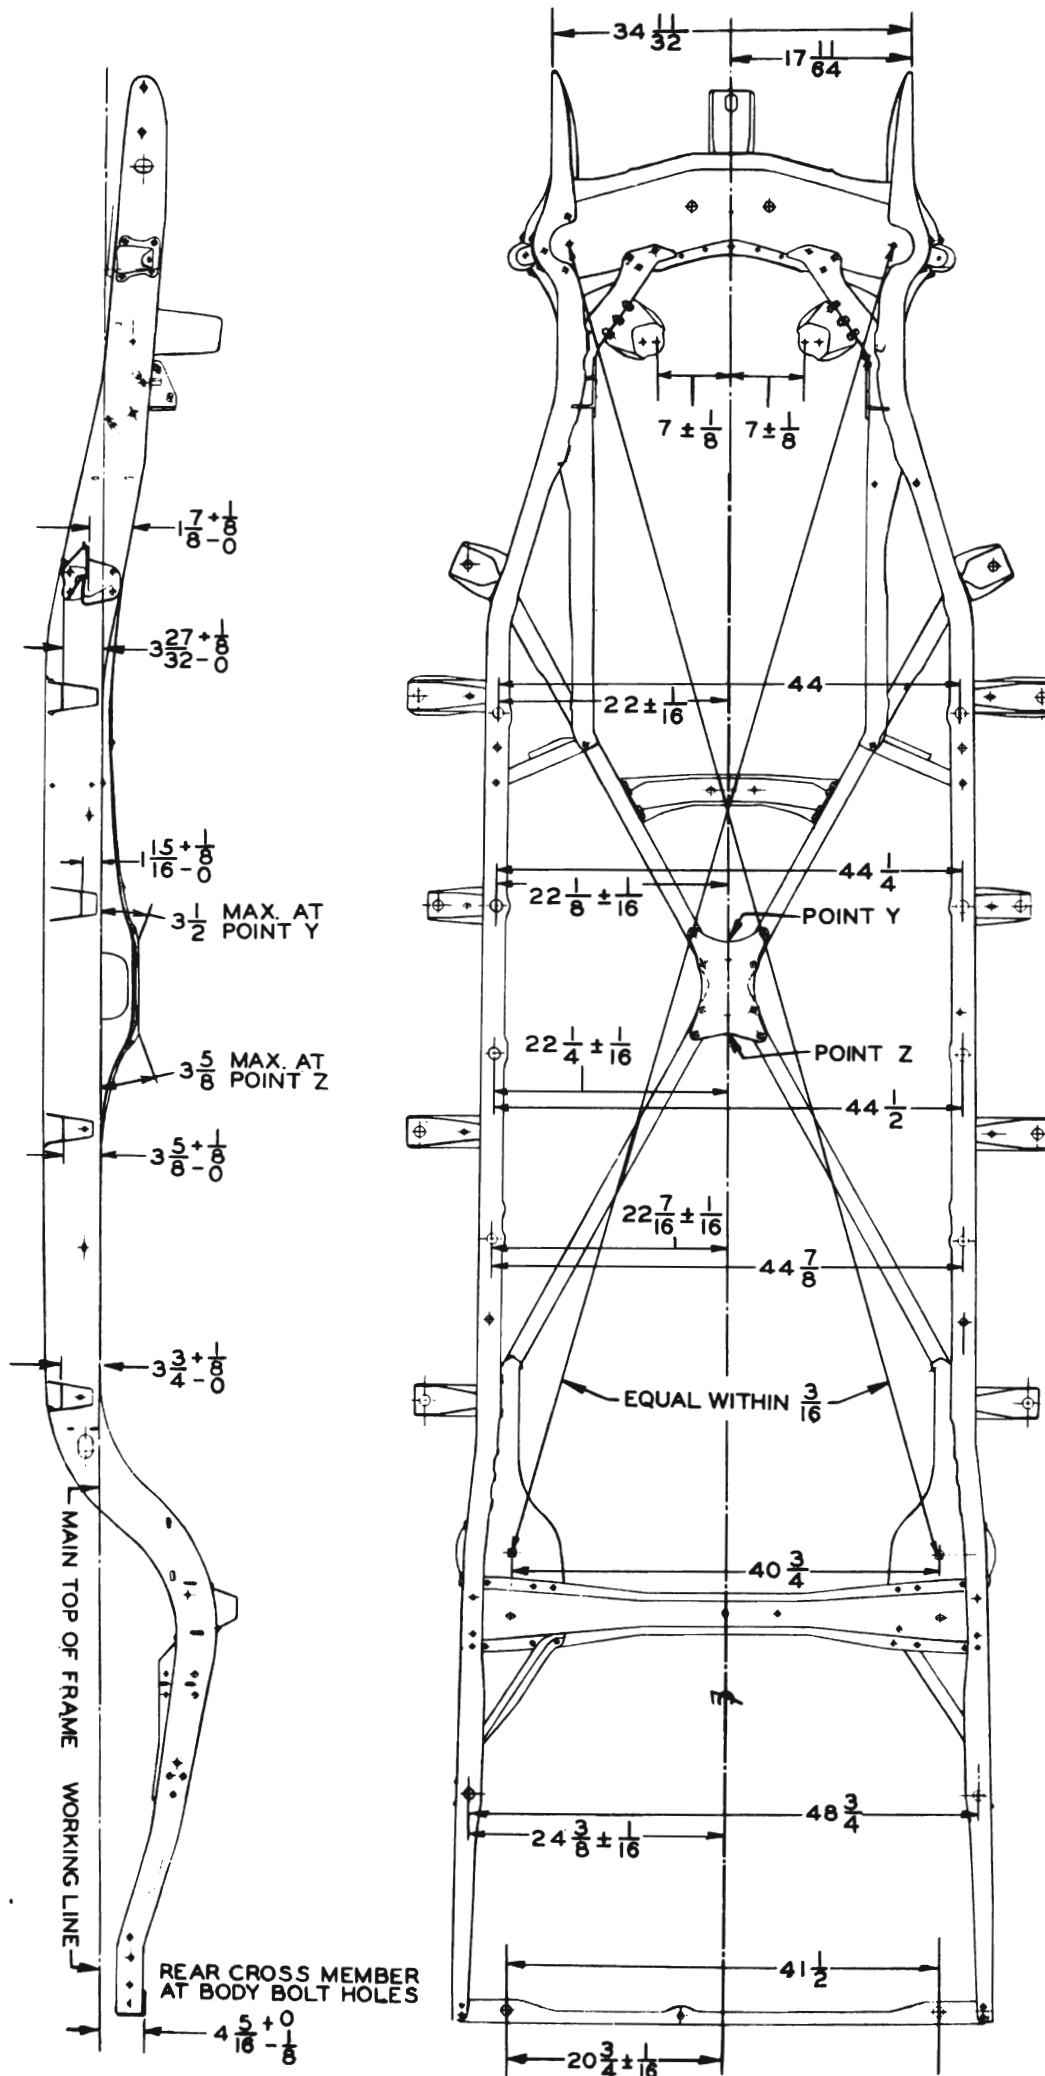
Frame Checking Dimensions—1948 Series 50
